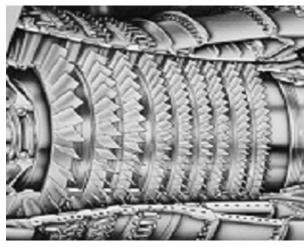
$\,$ GE F101 inertia welded compressor rotor in titanium and Inconel 718 superalloy.
